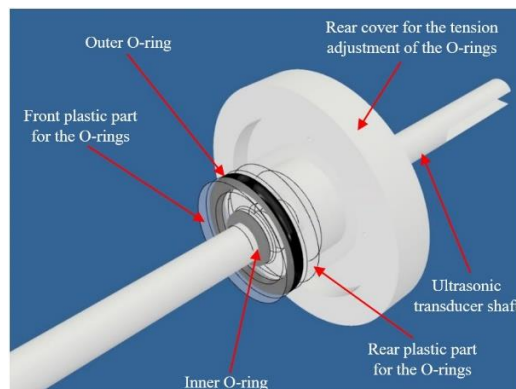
The CAD drawing of the seal mechanism that was used to hold the transducer inside the probe.
